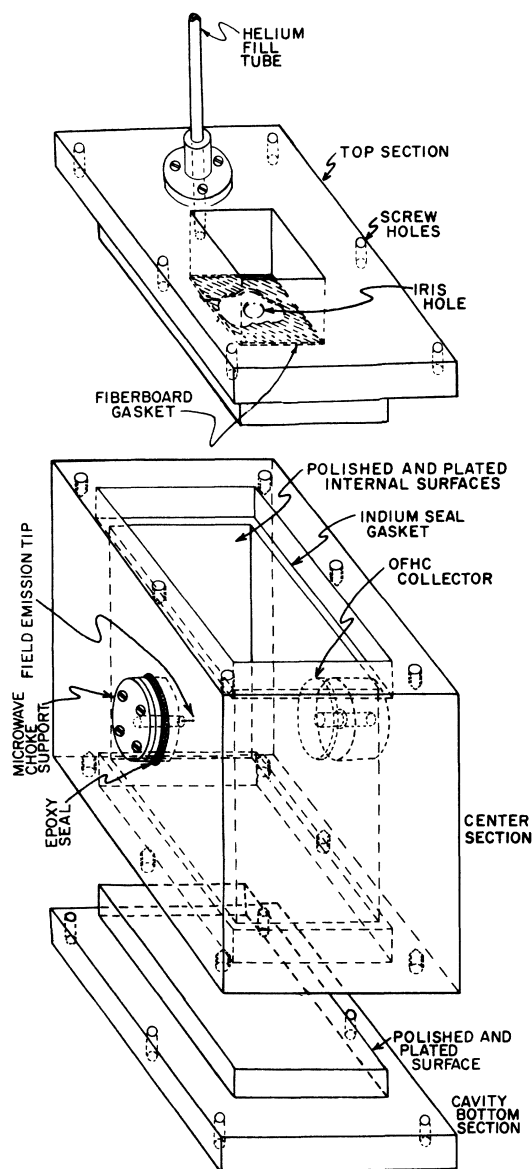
Exploded view of the pressure sealed microwave cavity.
